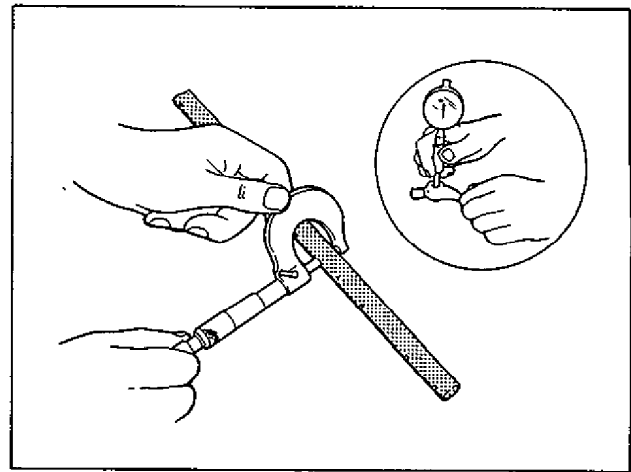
A-67 Measuring Shaft Dia. and Arm I.D.
